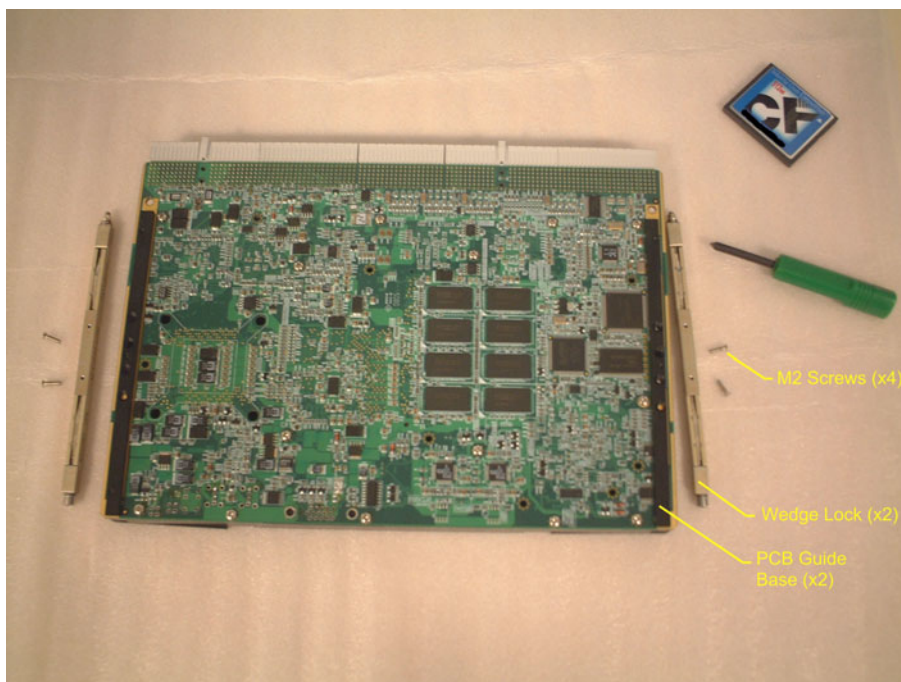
Remove the wedge locks from the conduction-cooled plate
